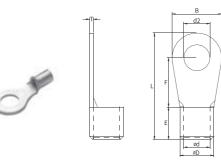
Appearance and dimensions of the circular naked lugs (TO Type)
